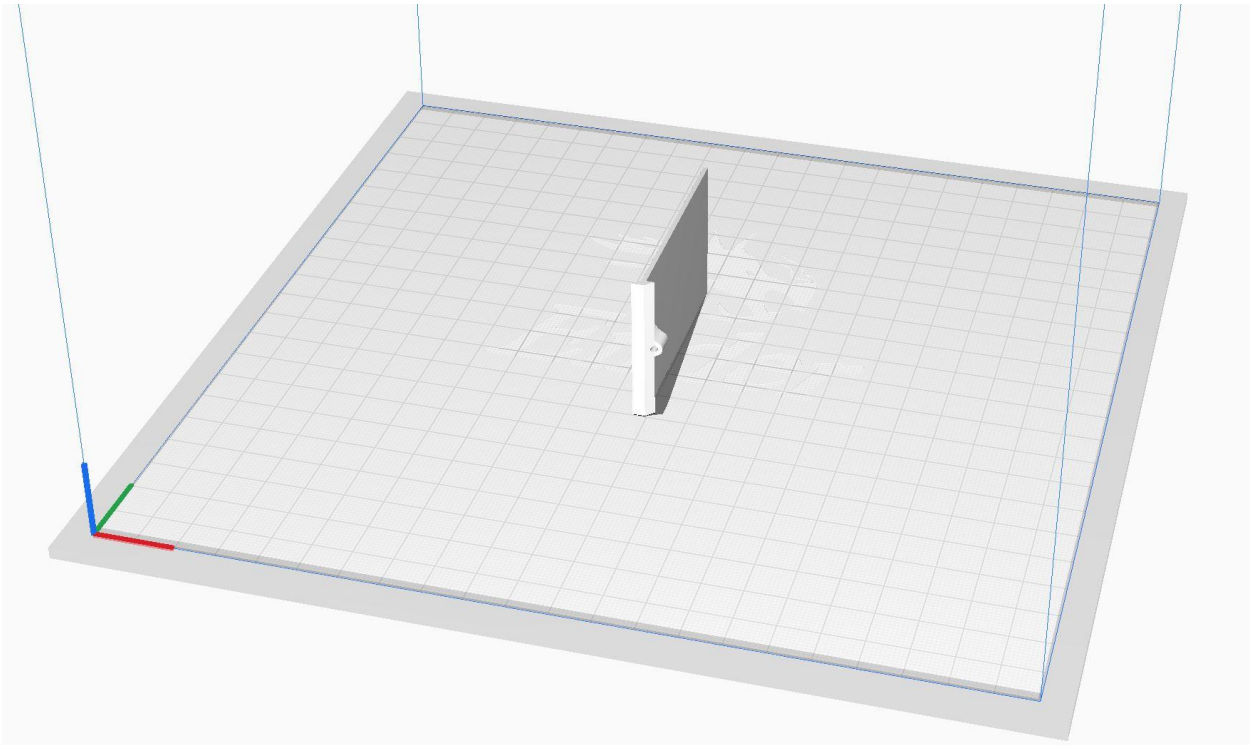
Print orientation for the Pico shielding piece. Note that, aside from fitting into the attachment piece (including the M1.6 screw hole) though, not a lot of dimensional accuracy is strictly necessary for this piece as it will just be backing for EMI shielding.
